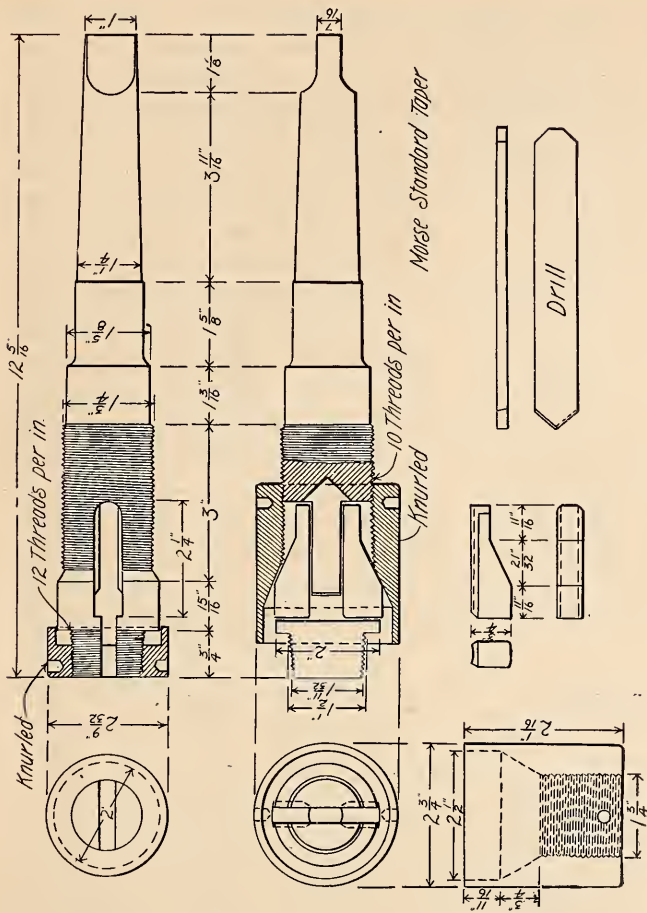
DRILL CHUCK FOR HIGH SPEED TOOL STEEL.
